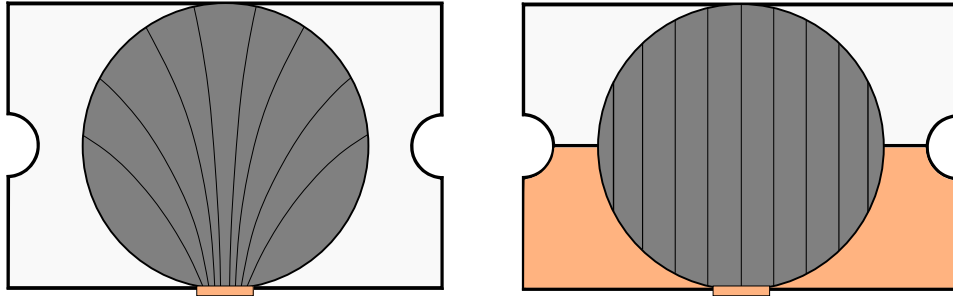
Expected alignment improvement in freeze-casting using the proposed mould concept (8-piece upgrade with a copper bottom section).
